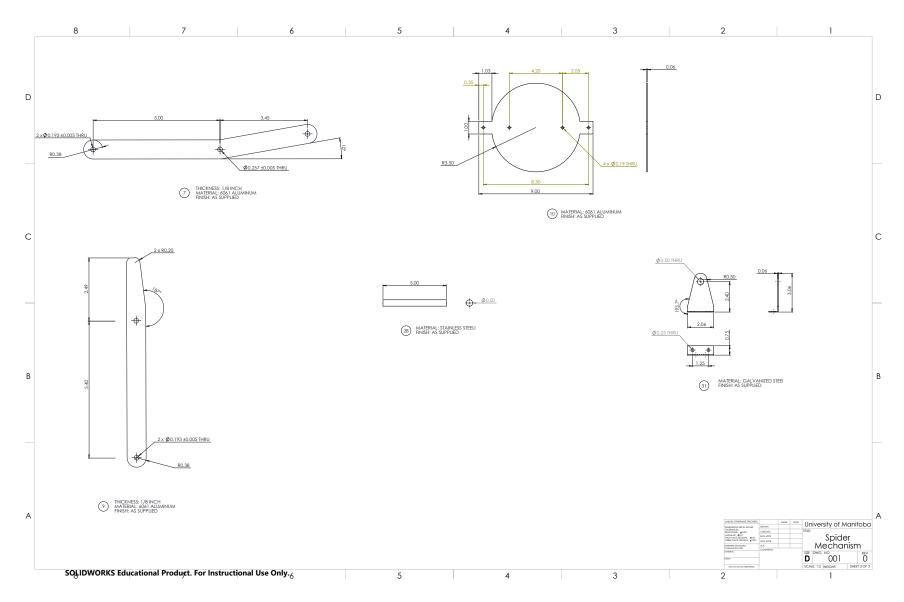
Spider mechanism detailed drawing sheet 3 [1].
